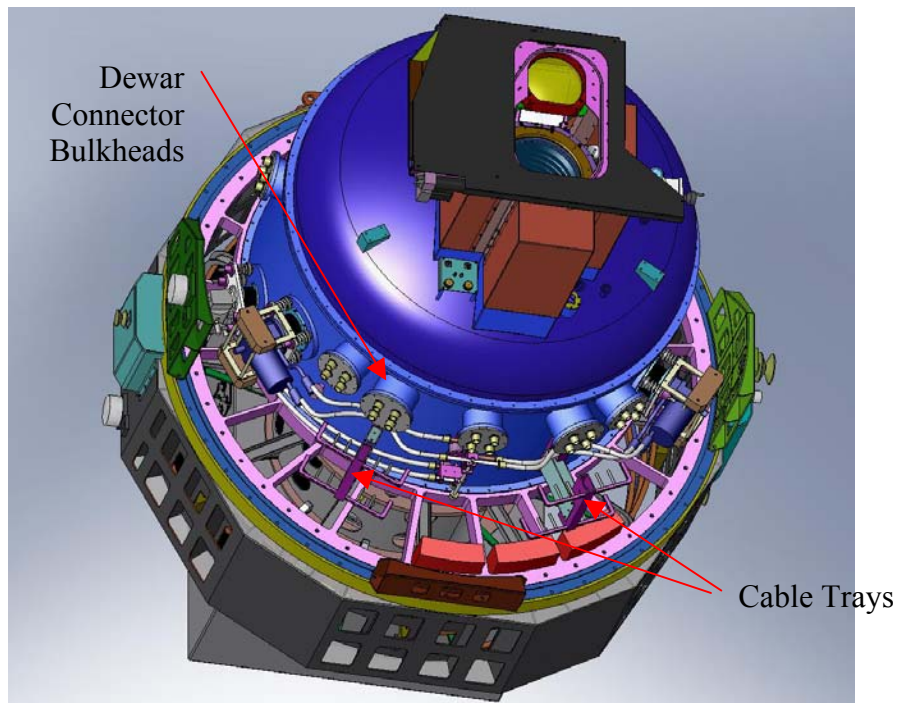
MOSFIRE Bottom Front View Showing Connector Bulkheads
